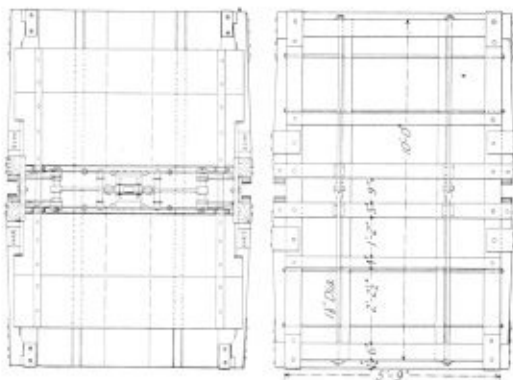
LEHIGH AND WILKES-BARRE COAL CO.'S STANDARD SHAFT CAGE.
